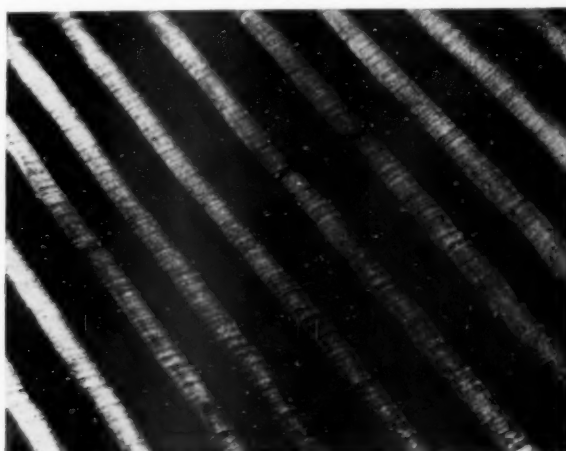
Close-up of cracked bars inside rotor H after dissolving the iron core.
